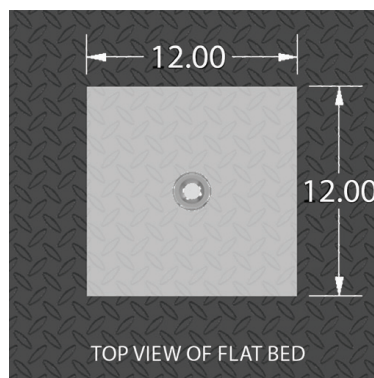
Top View: Recommended that Shift Lock coupler have a minimum clearance of 12" x 12"
